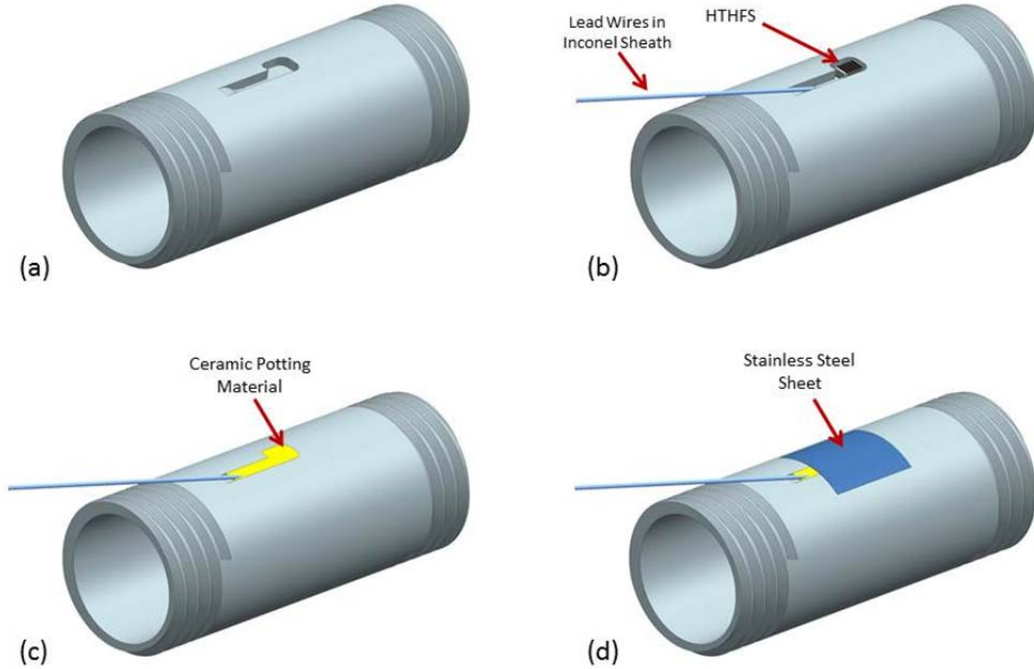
Heat flux sensor mounting drawings: (a) Stainless pipe with sensor cavity. (b) Heat flux sensor mounted in the sensor cavity. (c) Sensor cavity filled with ceramic potting material. (d) Stainless steel sheet bonded and welded to pipe over sensor cavity.
